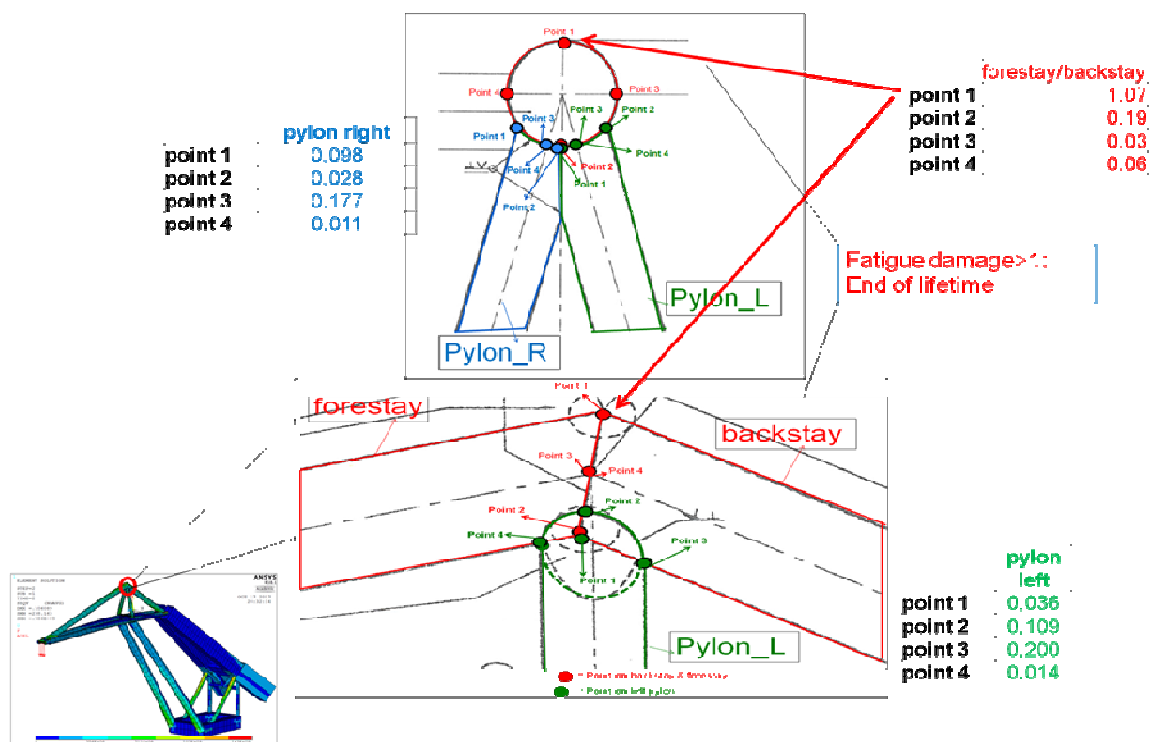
Illustration fatigue damage at tubular welded joint according to the NEN crane standard
